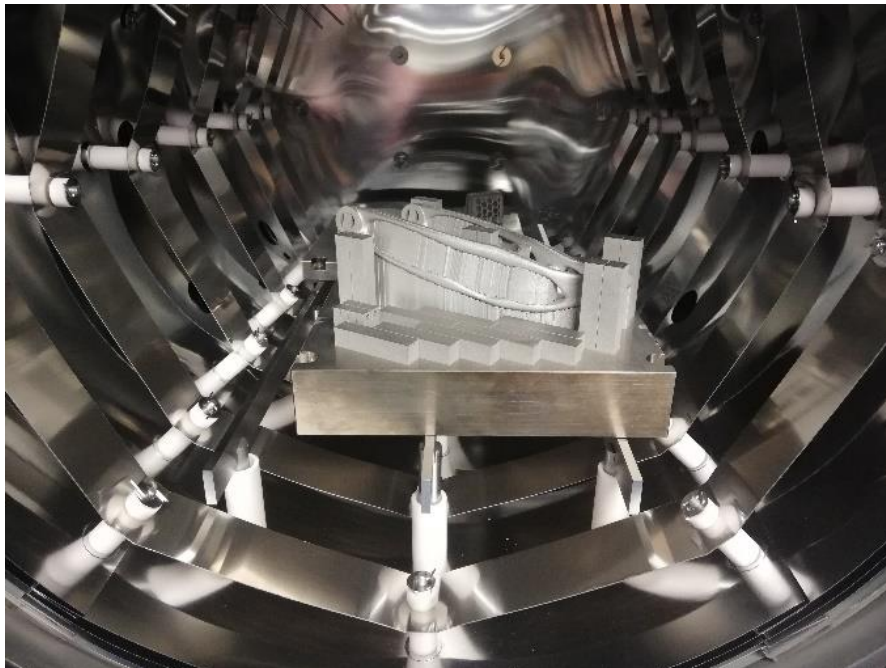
Ti6Al4V parts inside the T-M Vacuum Products Inc. Super Series Vacuum Furnace, SS12/24-13MDX, prior to the stress-relieving heat treatment
